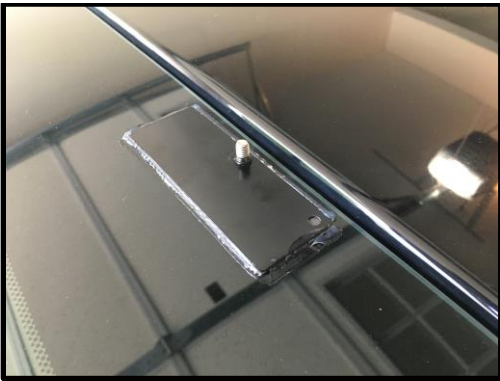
Figure G: Attachment Bracket with Clear Super Silicone Sealant
